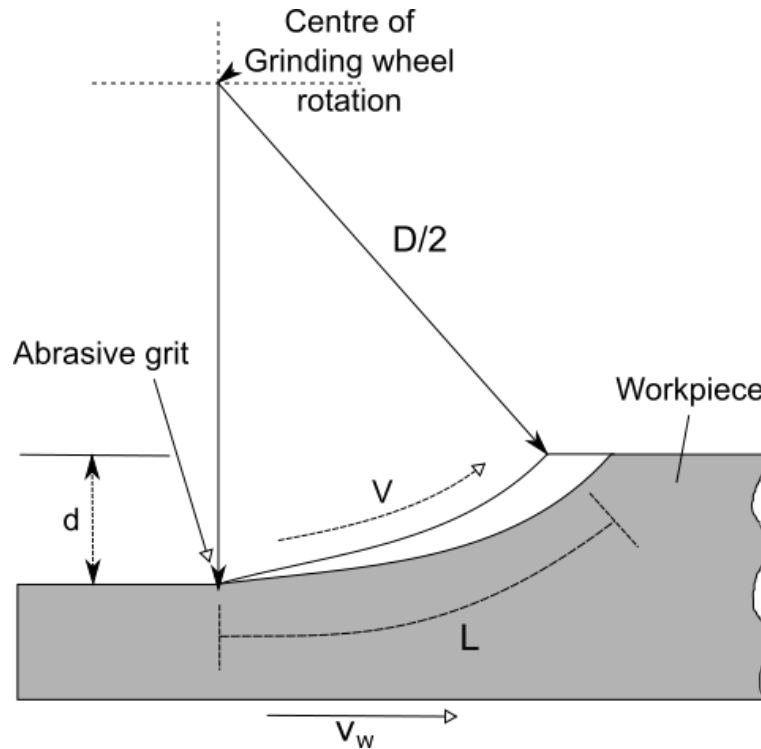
(A) SCHEMATIC OF THE MOVEMENT OF A GRIT OVER A WORKPIECE [9].
